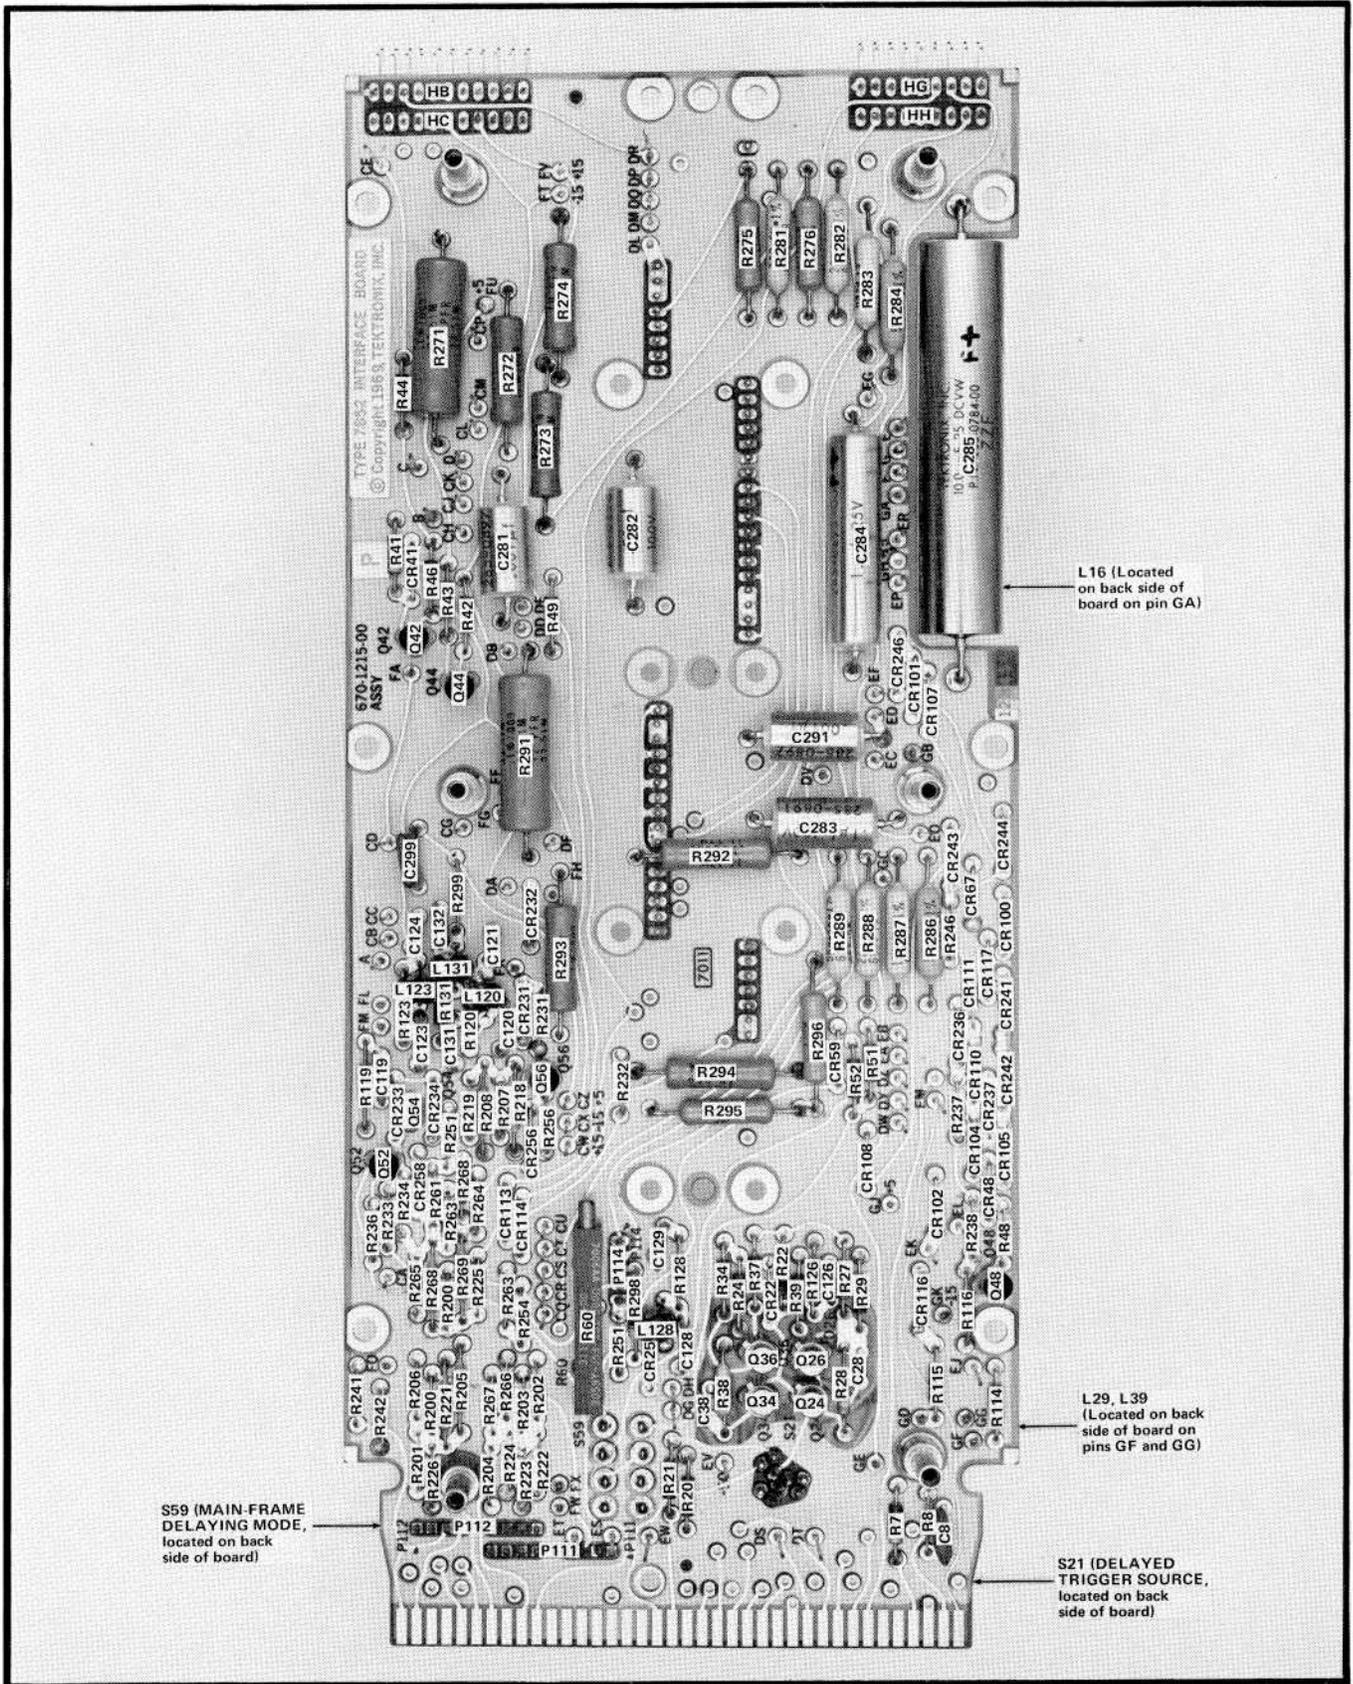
7B52 INTERFACE BOARD showing component locations.
